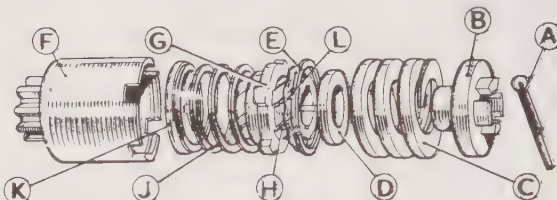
10 Type of drive assembly fitted to earlier starter motors.
